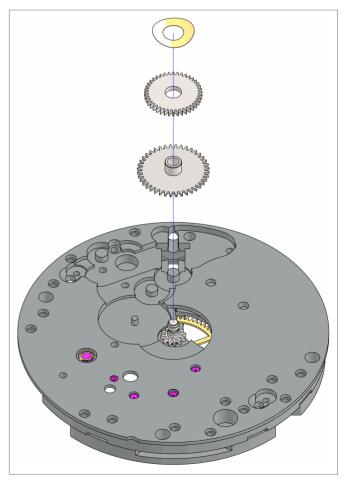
Exploded view of the hour wheel assembly with the gear that drives the retrograde indicator gear train.
